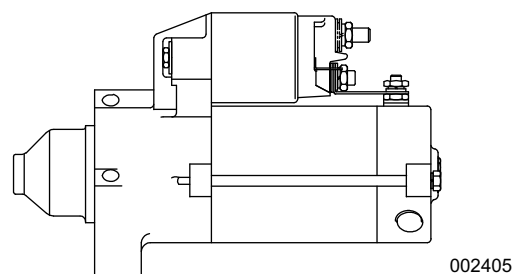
Starter Motor (V-Twins and units with 426cc Engine)
